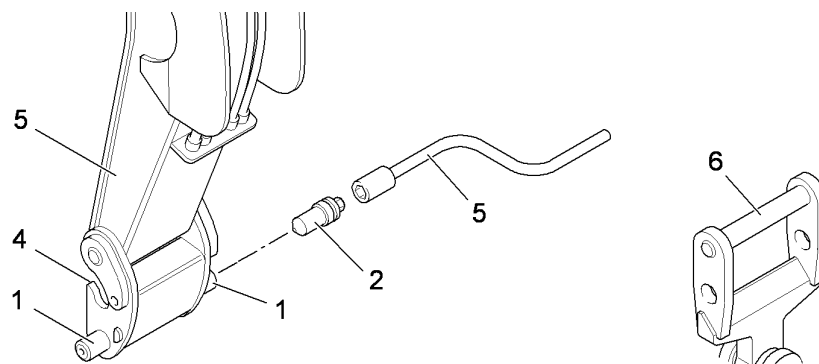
Industrial stick with mechanical quick-change adapter
